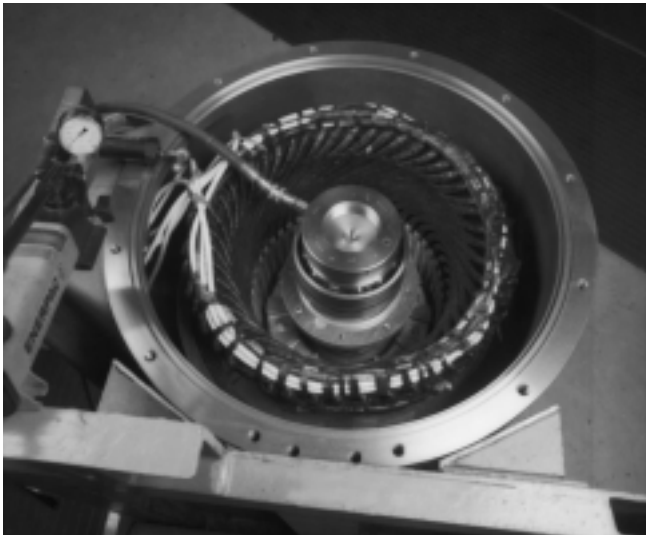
CVHF 1470 or 1720 motor with thrust bearings removed. The bearing cap is shown in place in preparation for a new thrust bearing installation.
